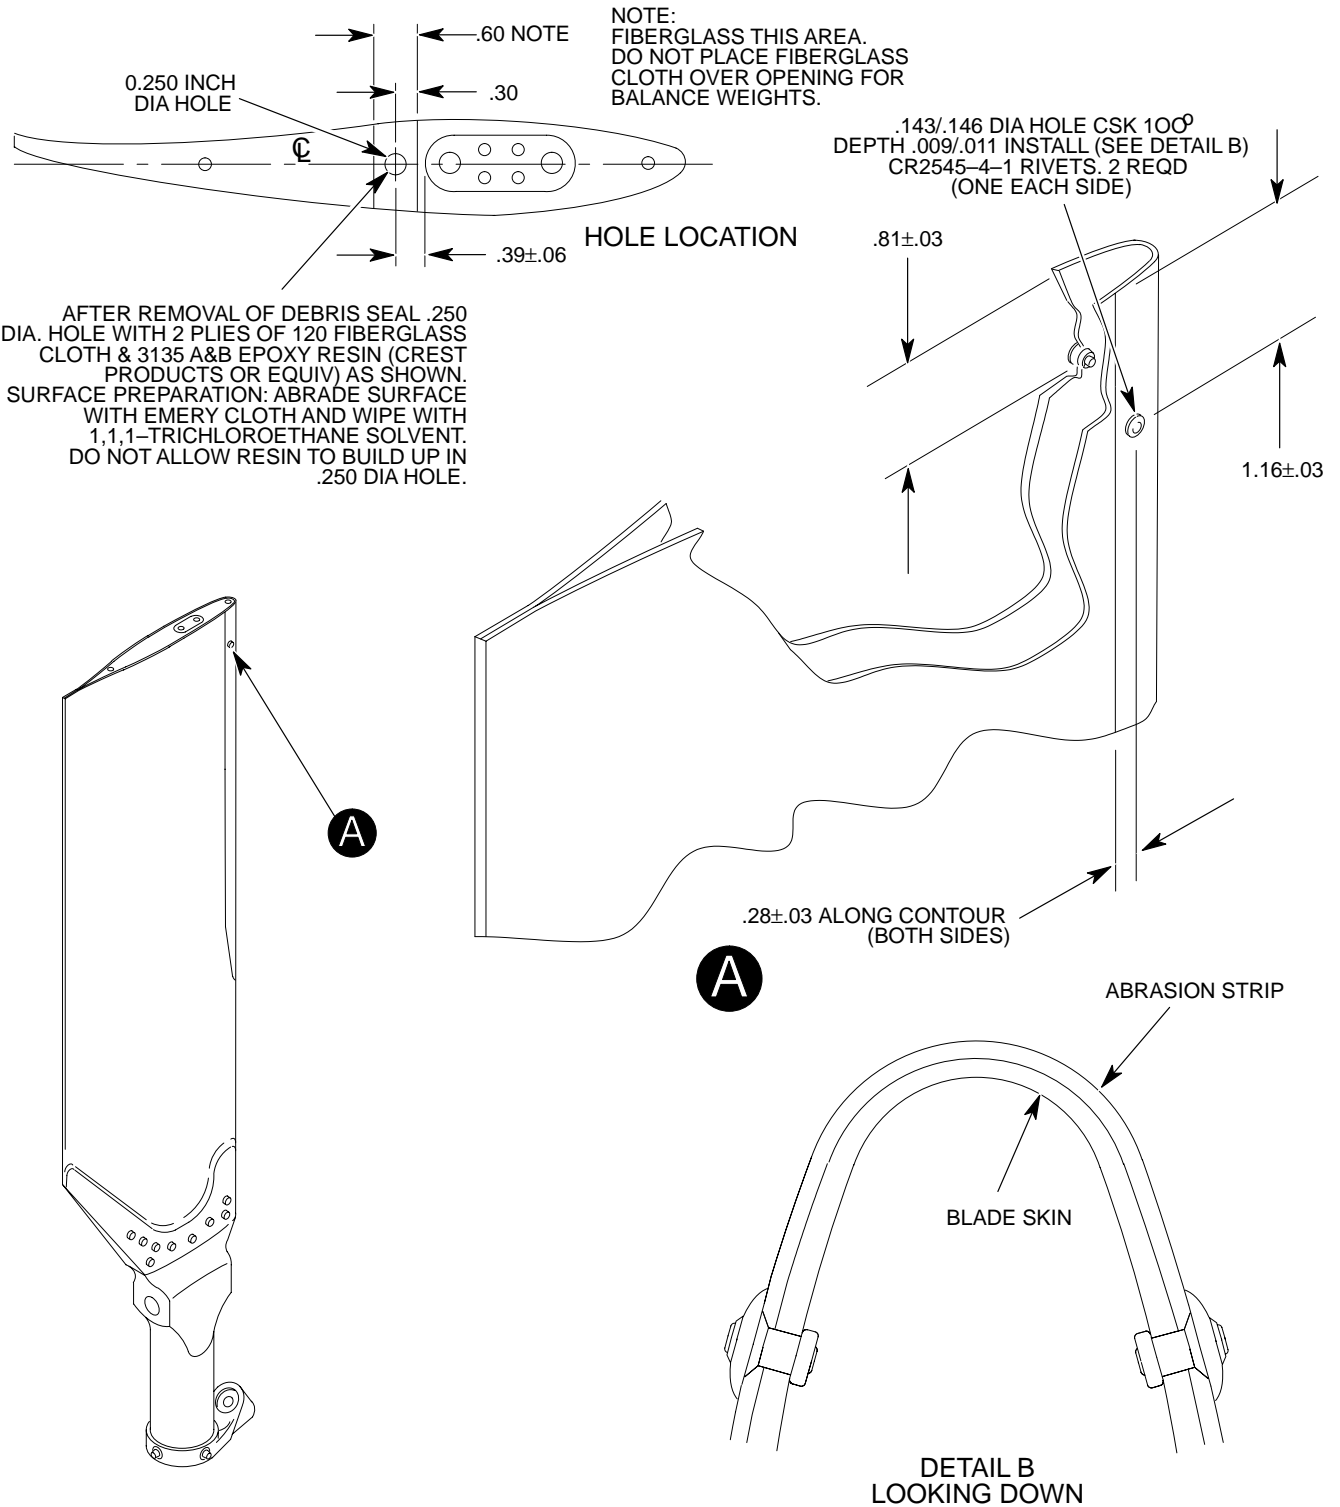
Addition of Rivets to Tail Rotor Abrasion Strip, FOD Removal from Blade Interior.
